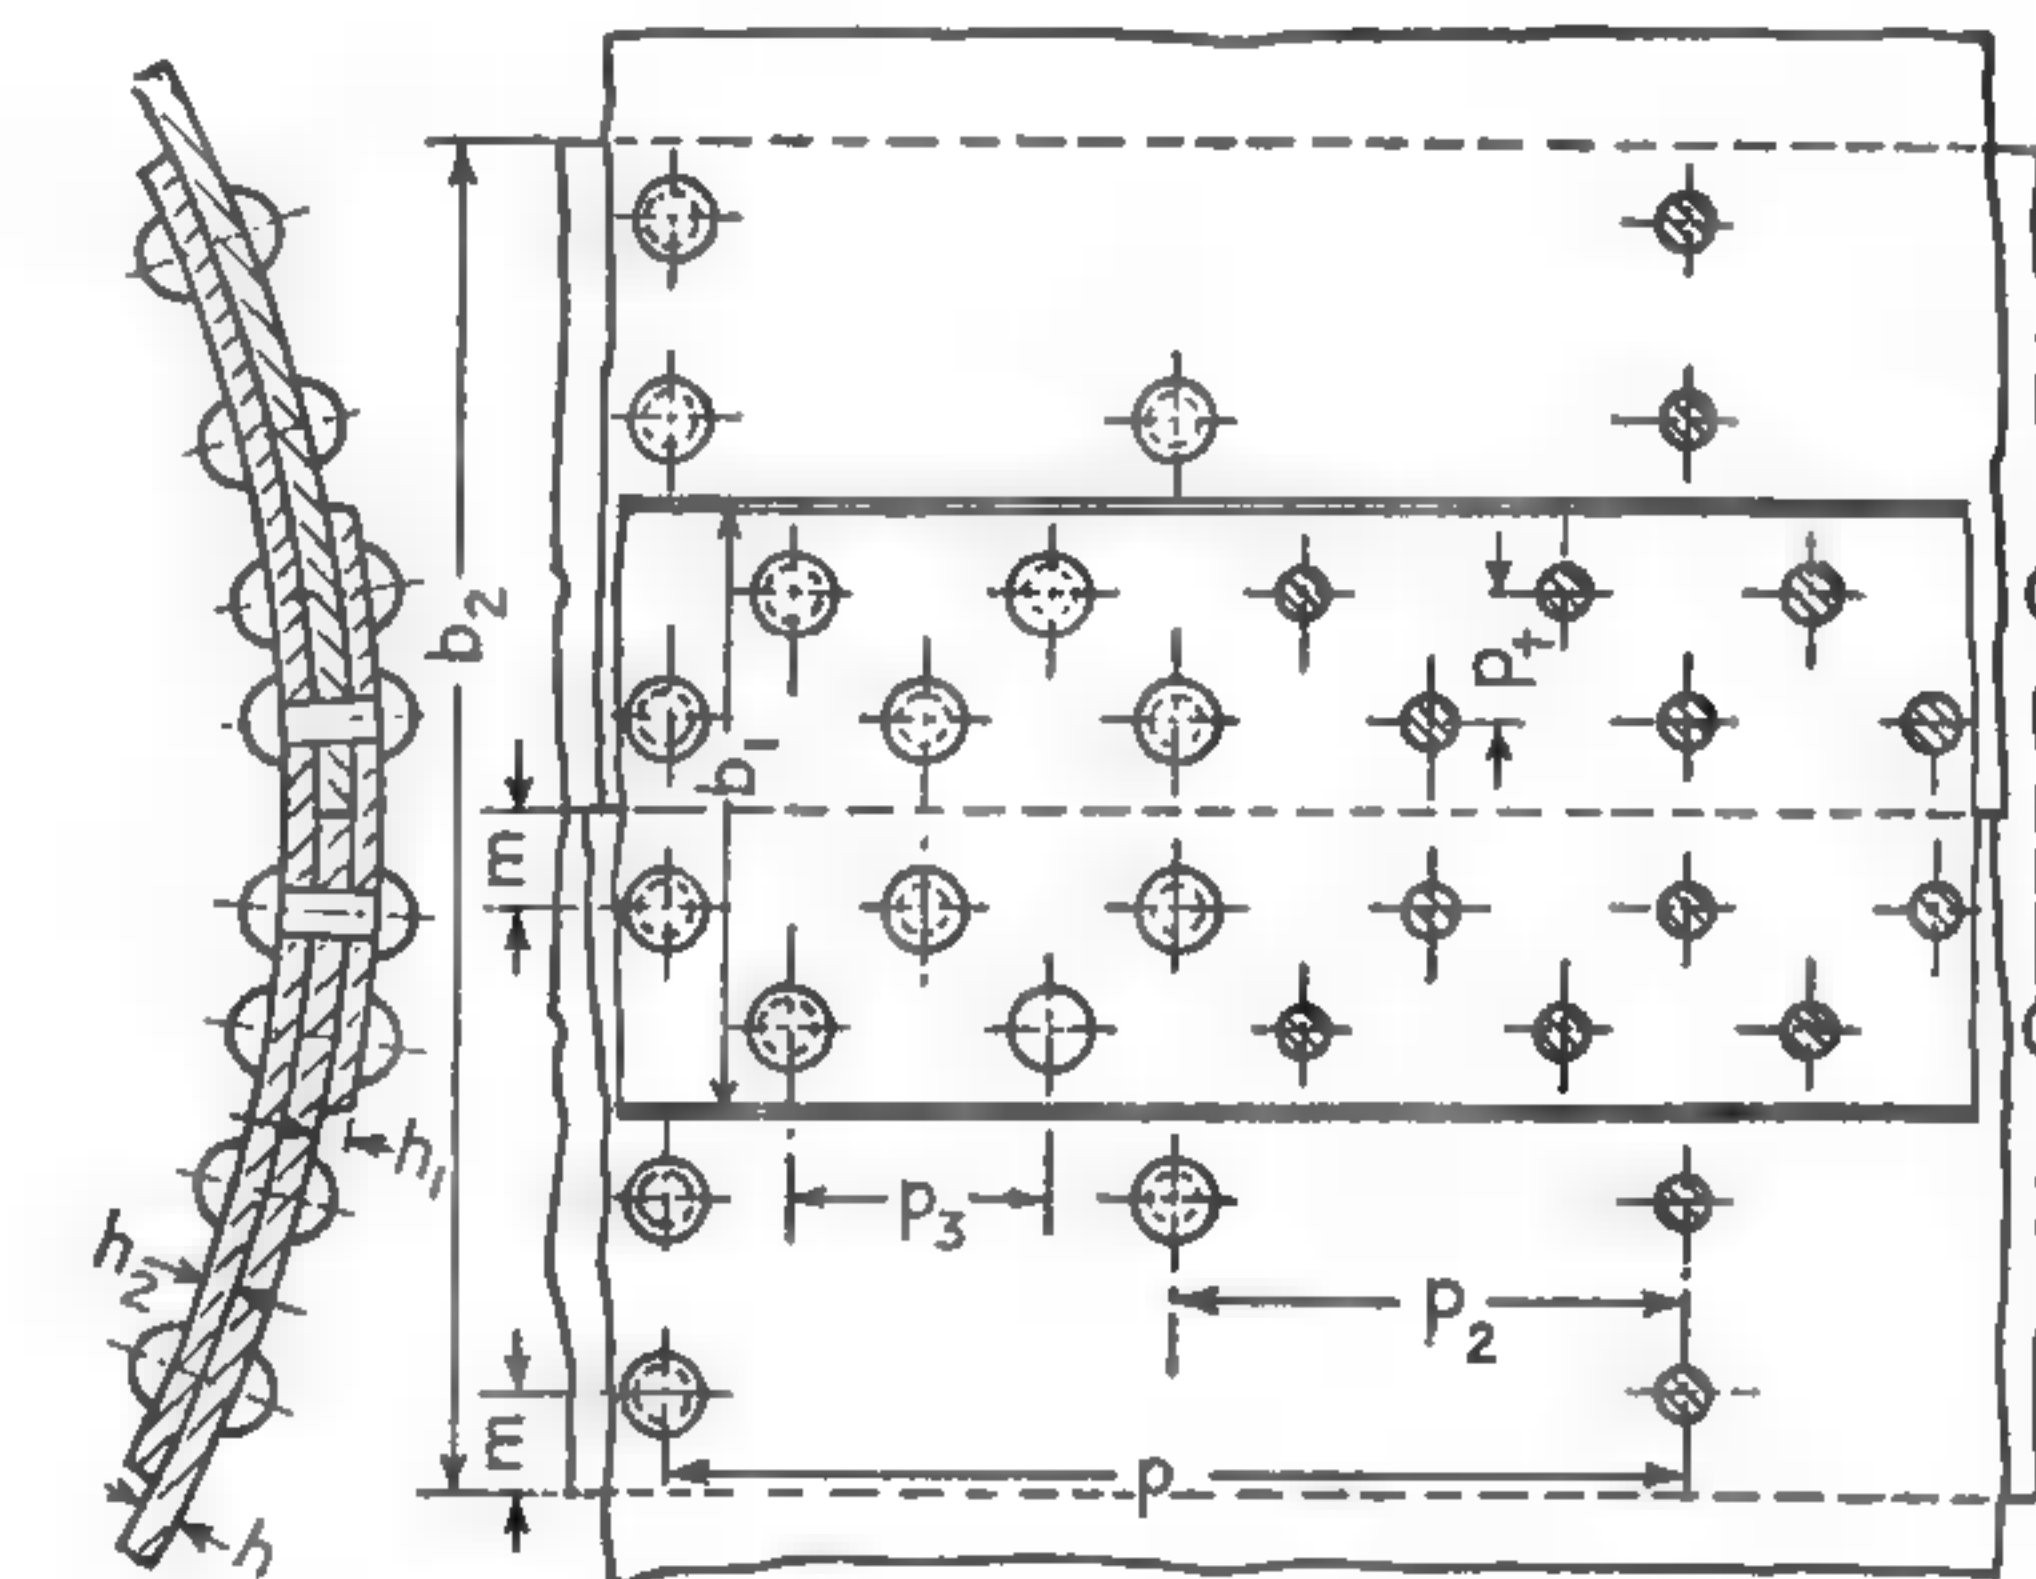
Quadruple-riveted double-strap butt joint.
